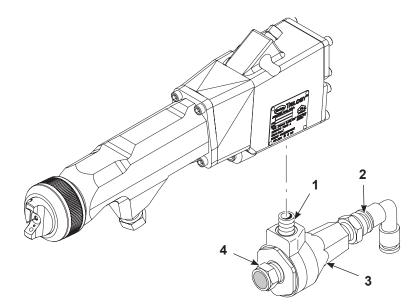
Optional Quick-Exhaust Valve Kit Installation
